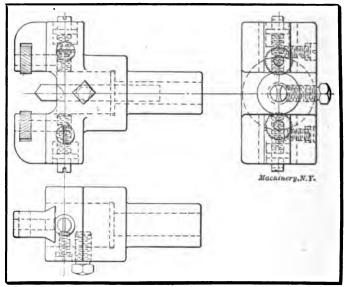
Turret Knurl-holder for Brown & Sharpe Automatic Screw Machines
